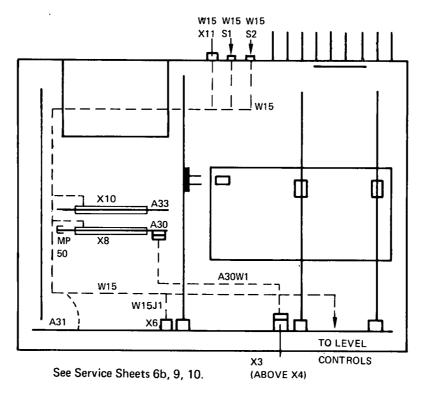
Location of additional parts and assemblies for 8015A option 003
